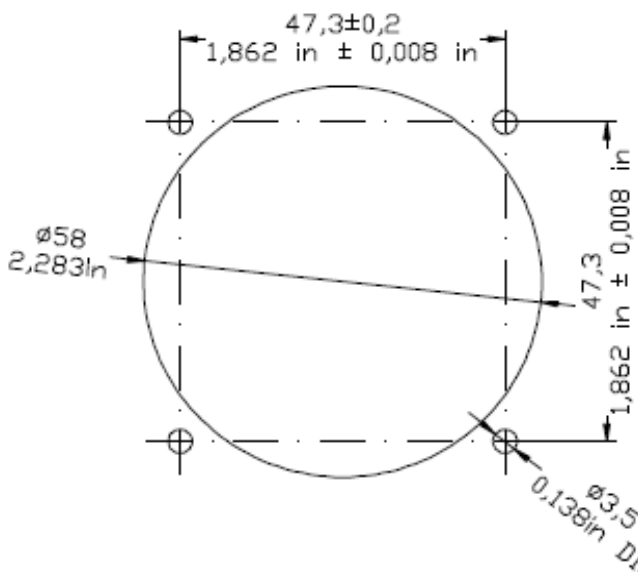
Drilling jig for back-panel mounting; dimensions in mm and (inches)
